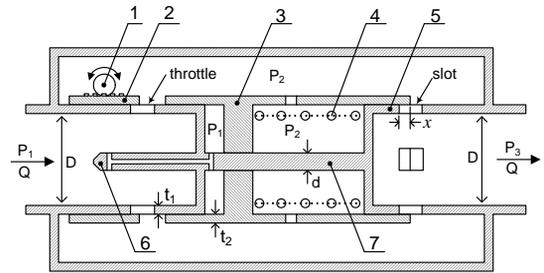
Cross-sectional view of a direct acting flow regulator; 1- rotating shaft, 2-sleeve, 3-spool, 4-spring, 5-guide, 6-pressure probe, 7-sliding rod
